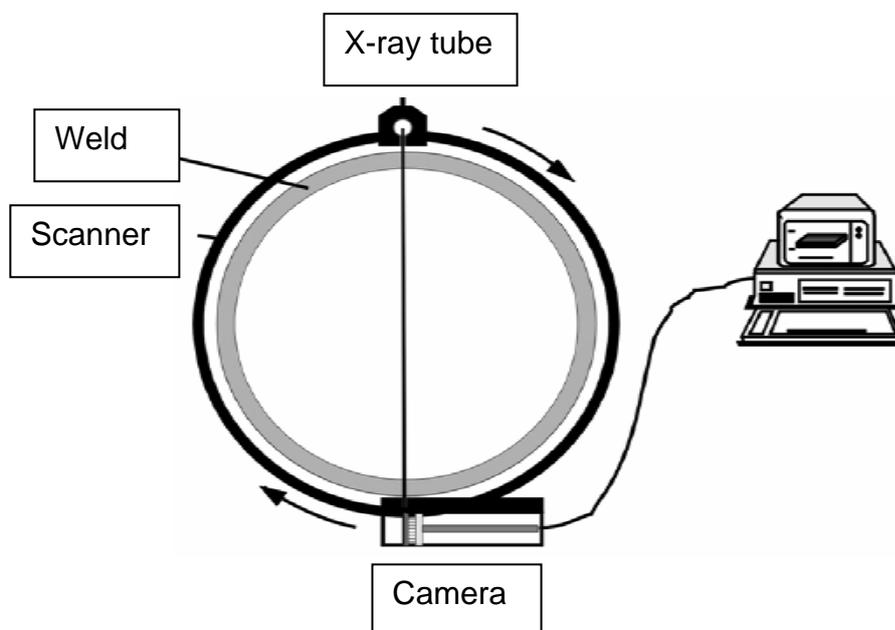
Radiometric weld inspection system "Tomocar"
